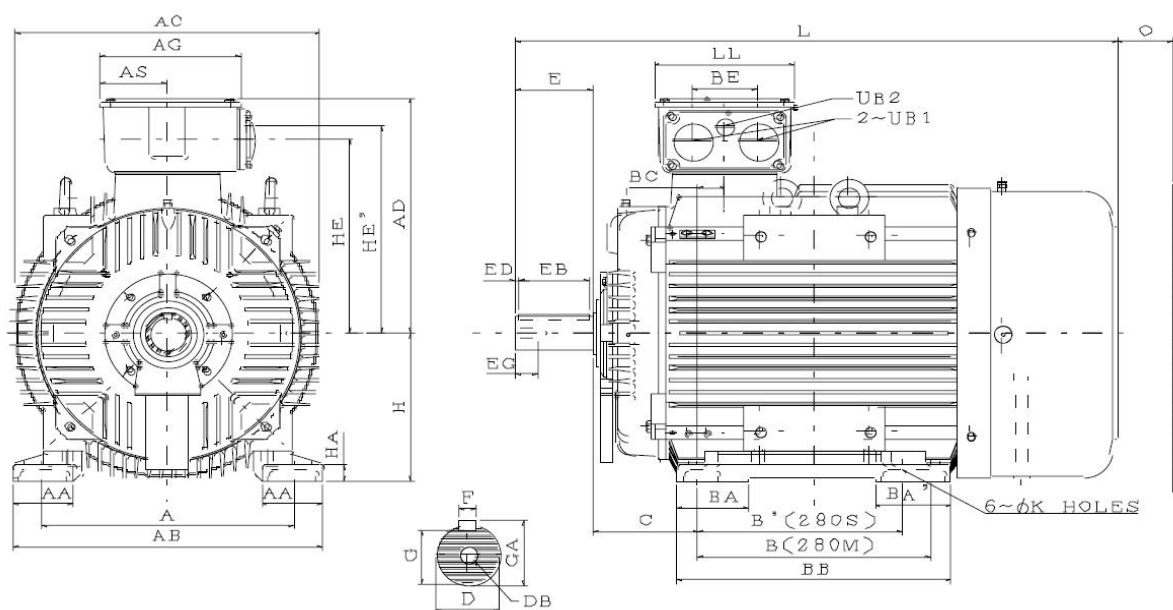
Outline drawing of cast iron design, feet version, mounting B3; frame size 280
